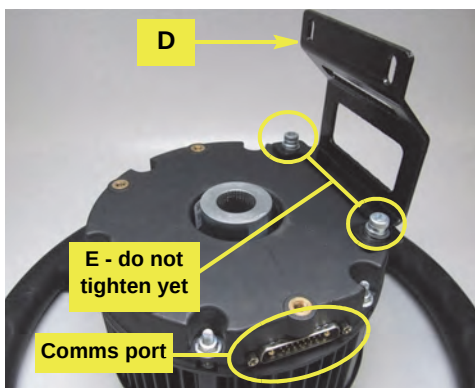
Anti-rotation bracket installed (do not tighten E yet). Comms port will be to the right of steering column when a/r bracket is mounted as shown and wheel assembly is installed.
